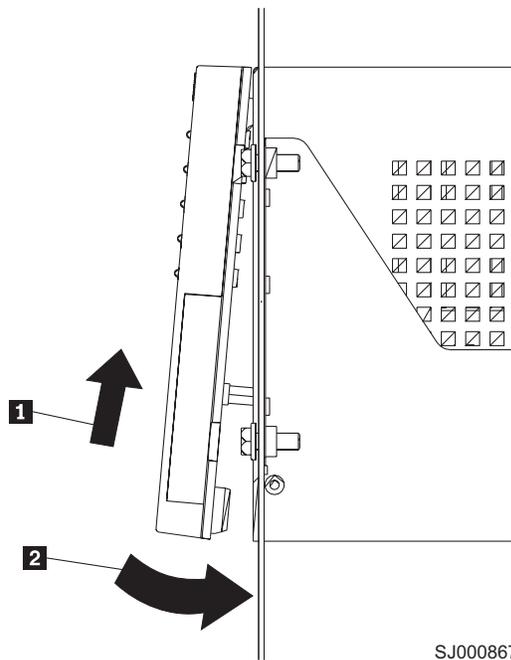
Replacing the controller unit bezel (machine types 3552 and 1742)
